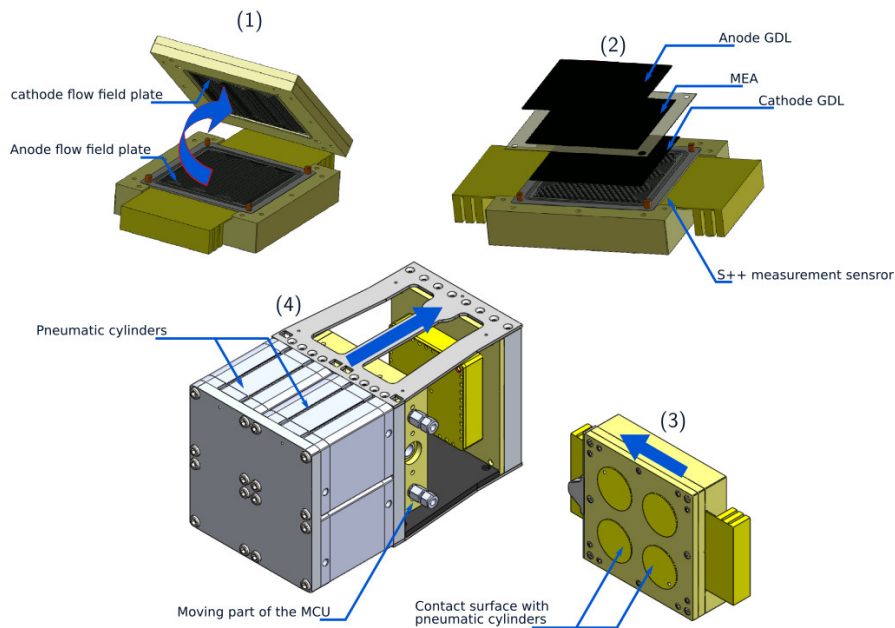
Mechanical compression unit: (1) opening of the qCf, (2) assembly of the PEFC components, (3) placement of the qCf, (4) application of the mechanical assembly compression by the four pneumatic cylinders (images courtesy of batlticFuelCells GmbH, Germany).
